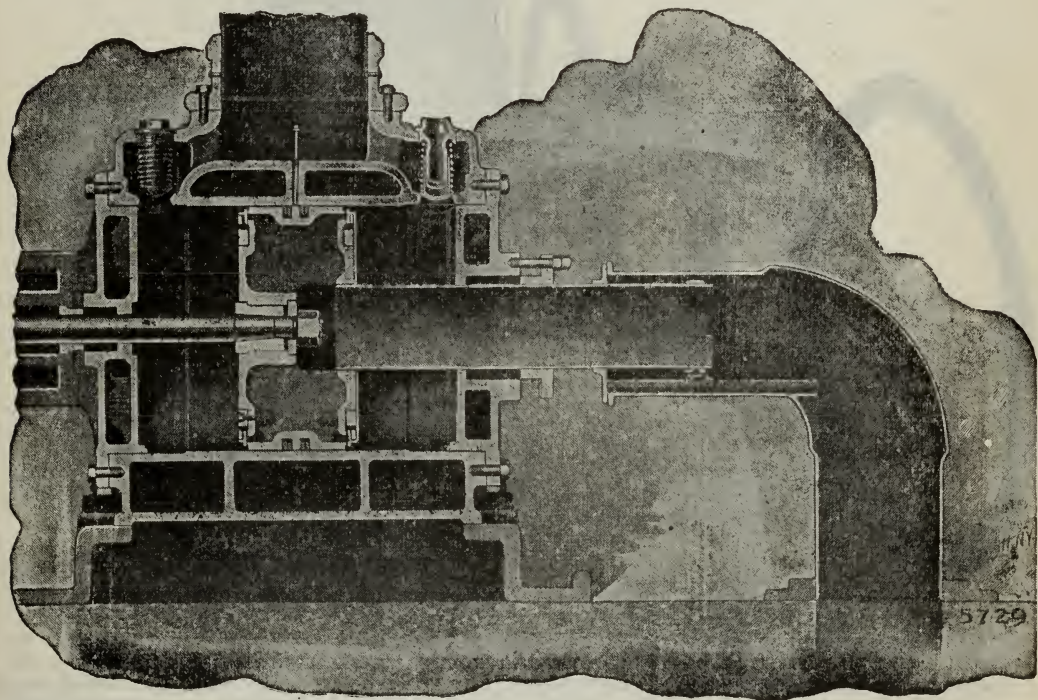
,353.—Ingersoll-Rand air cylinder with *hurricane inlet valves*.
